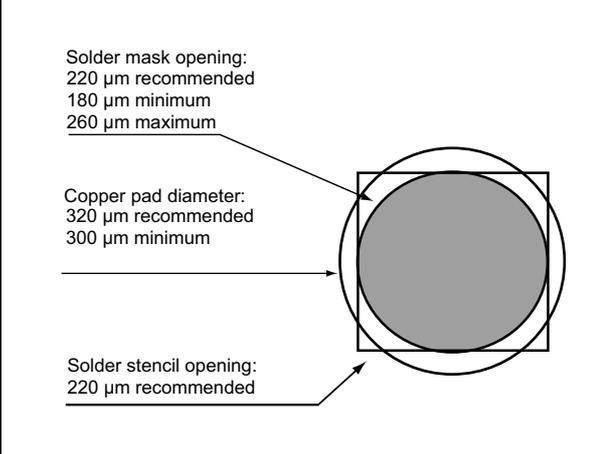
Footprint - 5 mils stencil - non solder mask defined
